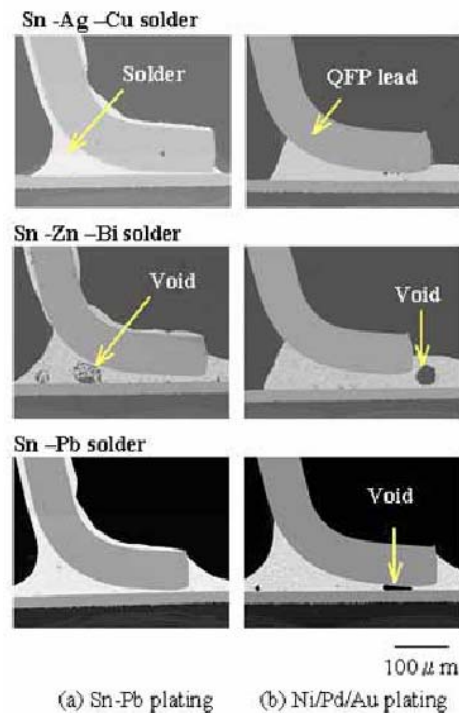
Cross - sectional BE Image of QFP Solder Joints after Assembly Process
